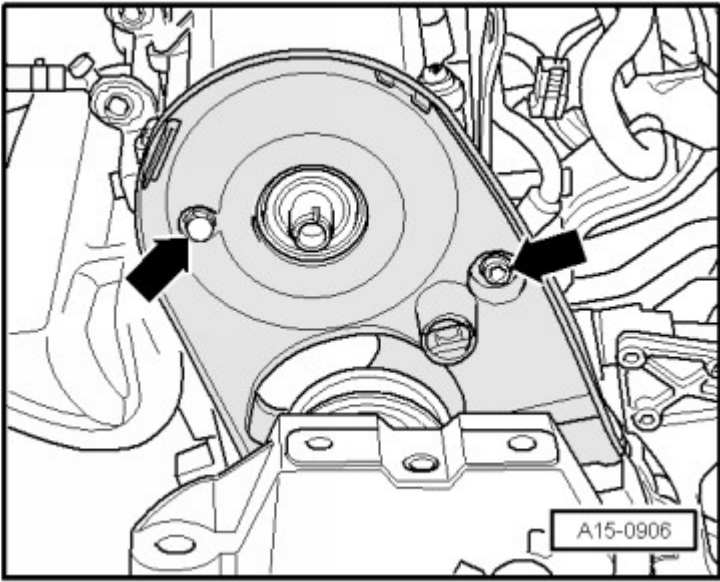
Rear Toothed Belt Housing And Cylinder Head
